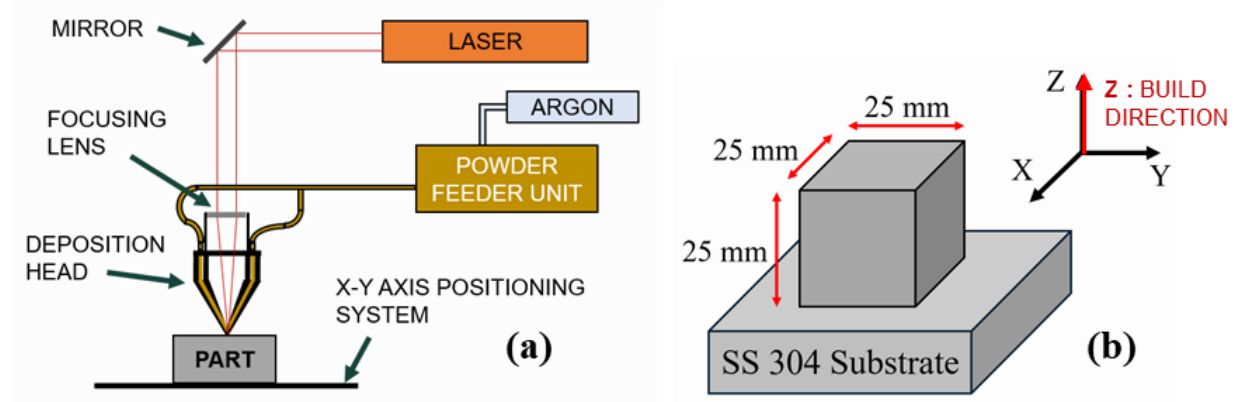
(a) Laser-DED sample fabrication setup, (b) 1-inch cube sample.
